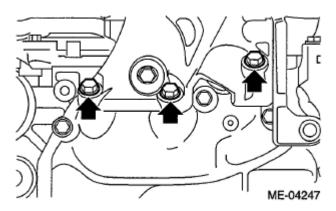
Locating Bolt And Engine Mounting Nuts Courtesy of SUBARU OF AMERICA, INC.
